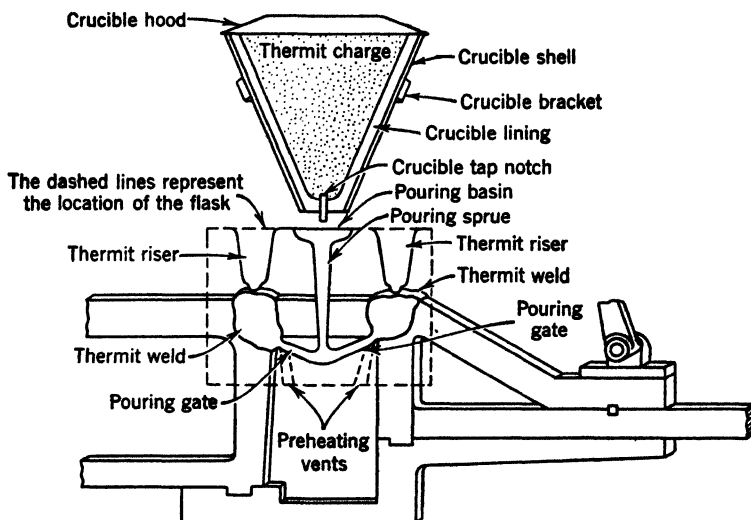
Thermit welding of a locomotive side frame.
